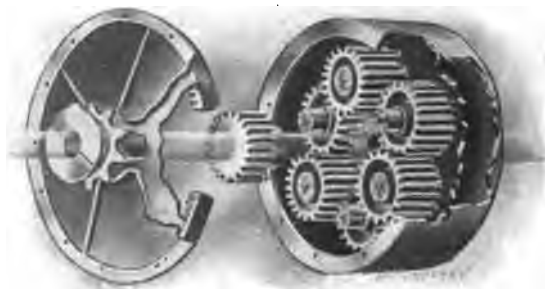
Planetary Transmission used on the Single-cylinder Engine
